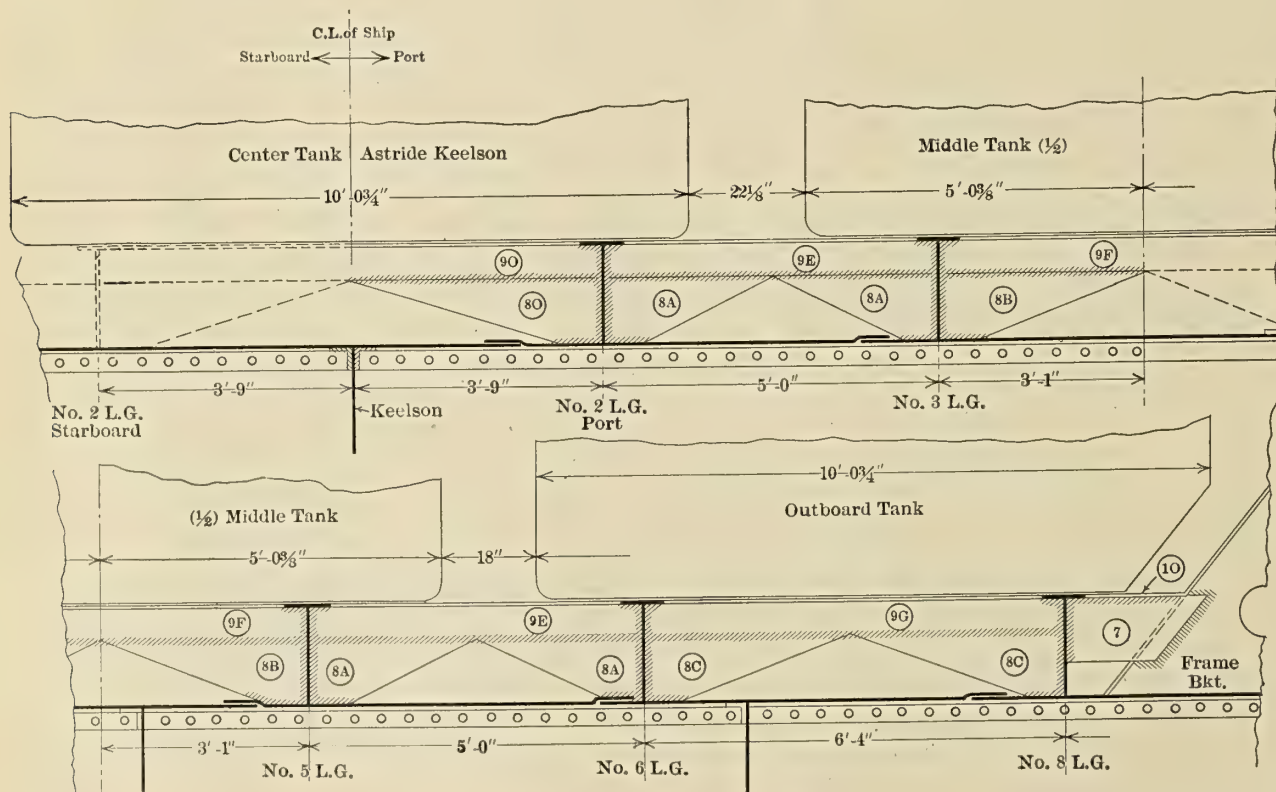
Elevation of Typical Intercoastal Girder, as on Floor No. 77, Hold No. 4, Looking Aft
